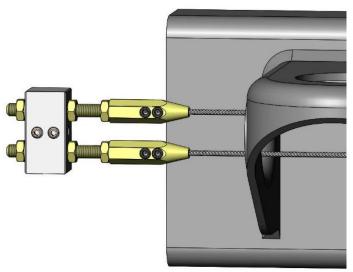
Installing Single Wire Unions into to Aluminum Attachment Block
